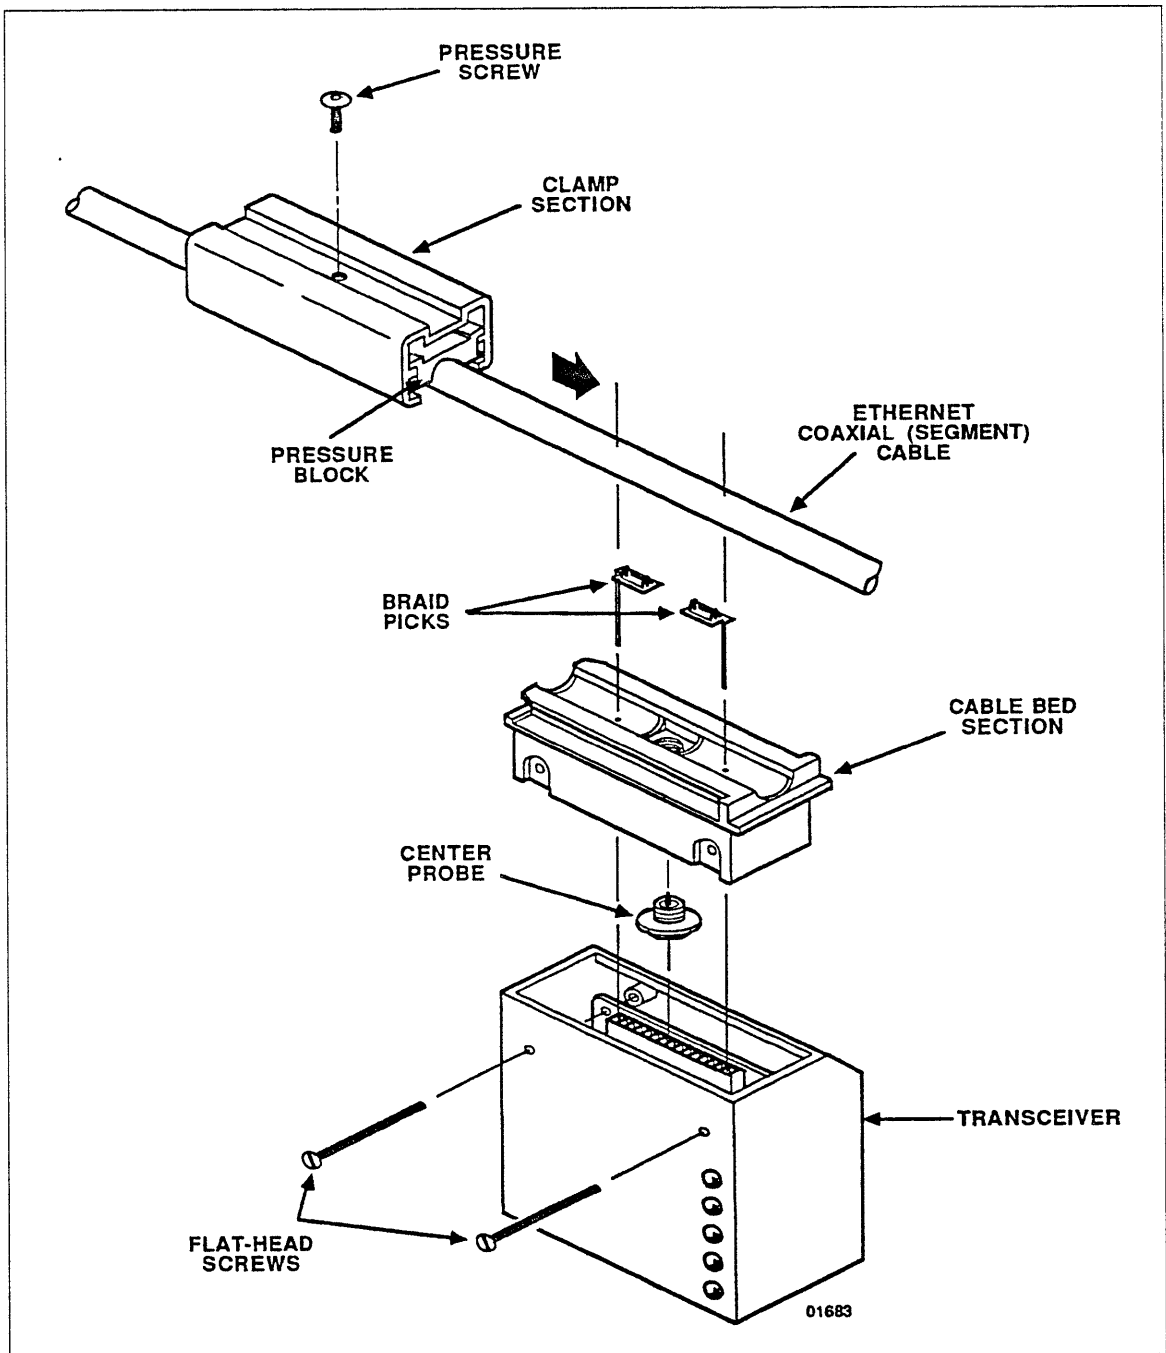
TN111B Transceiver and YA331A Tap Assembly Details
